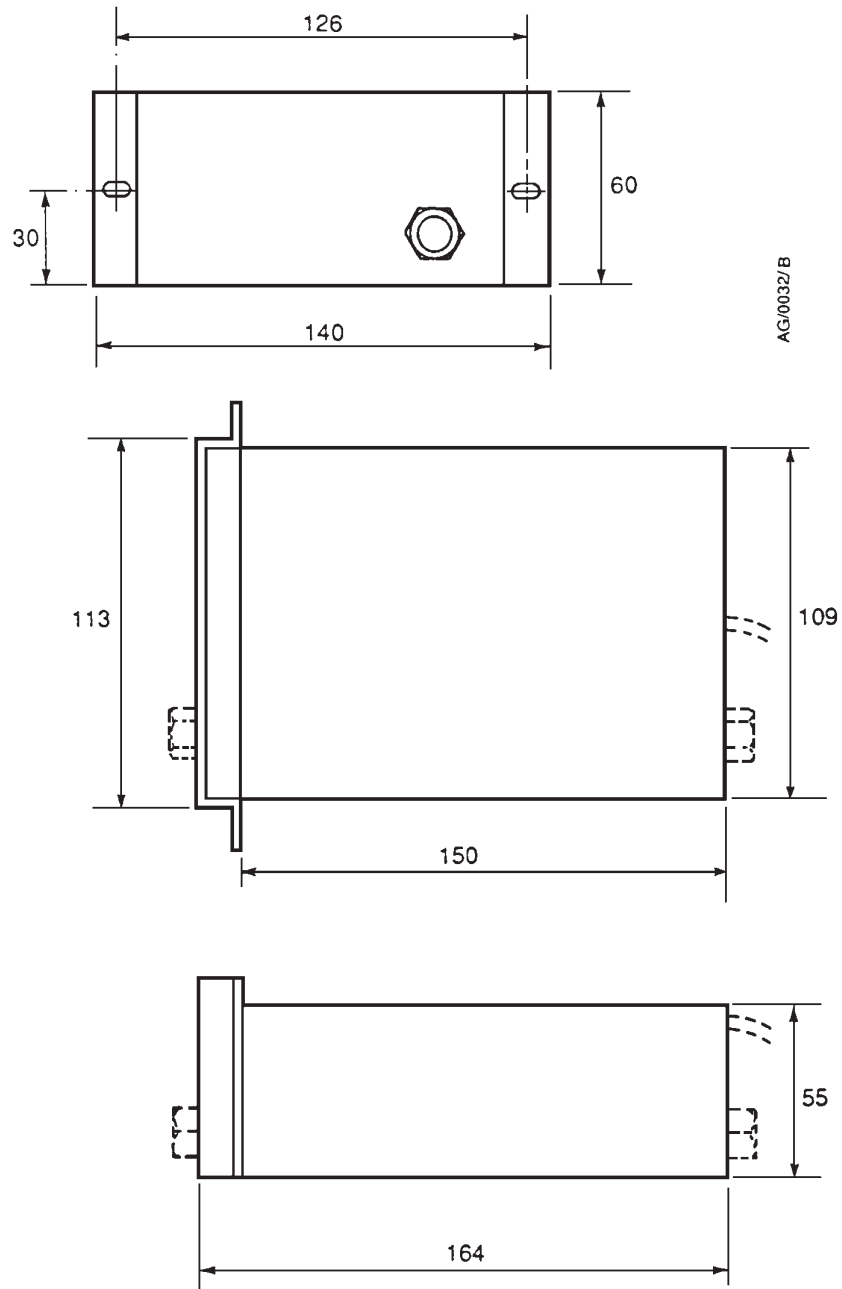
Q Series 3 Exhaust Pressure Module dimensions (mm)
